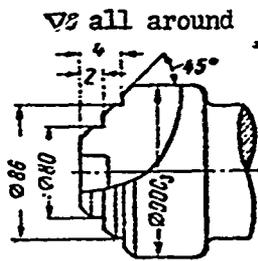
Special cutter for machining circular ledges in a mortar breach opening.
